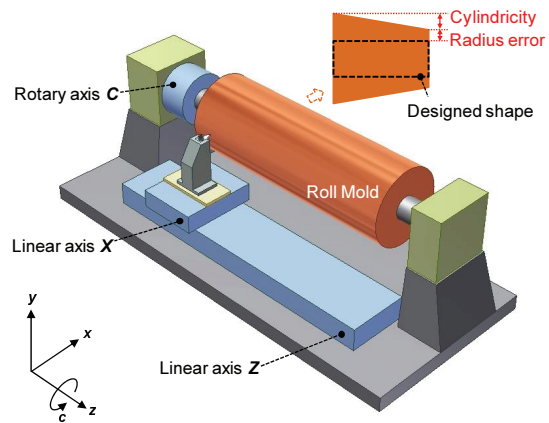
Configuration of an ultra-precision roll mold machine tool
